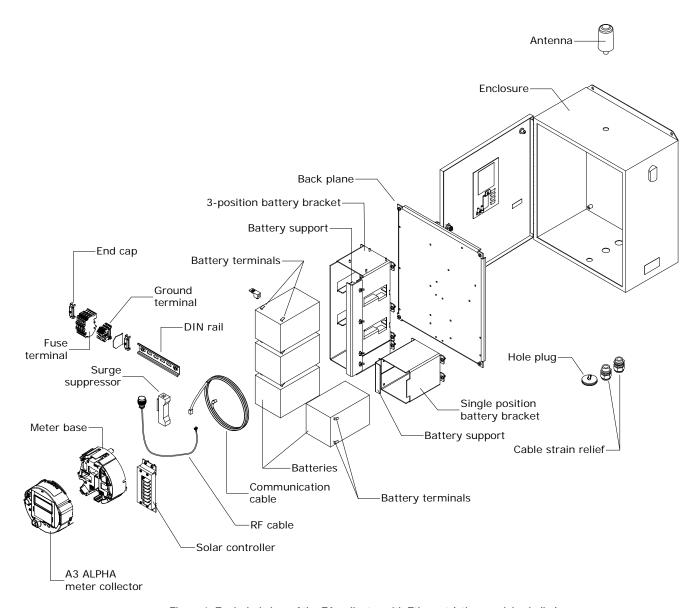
Exploded view of the EA collector with Ethernet (other models similar)
